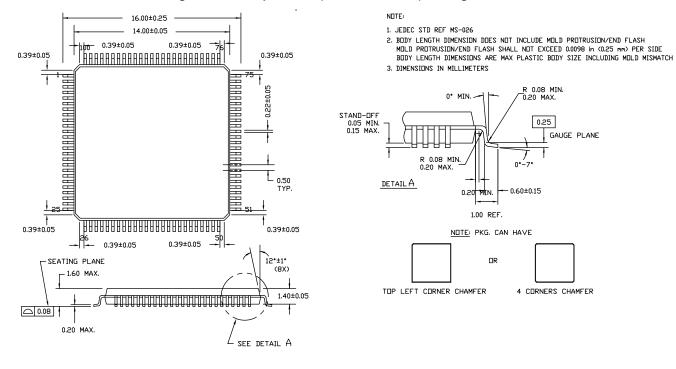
100-pin TQFP (14 × 14 × 1.4 mm) Package Outline
